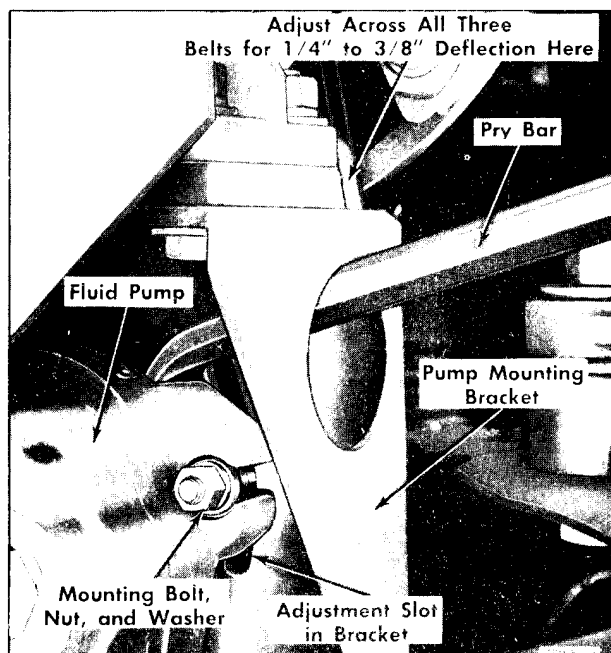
Checking and Adjusting Condenser Fan Drive Pump Belt Tension
